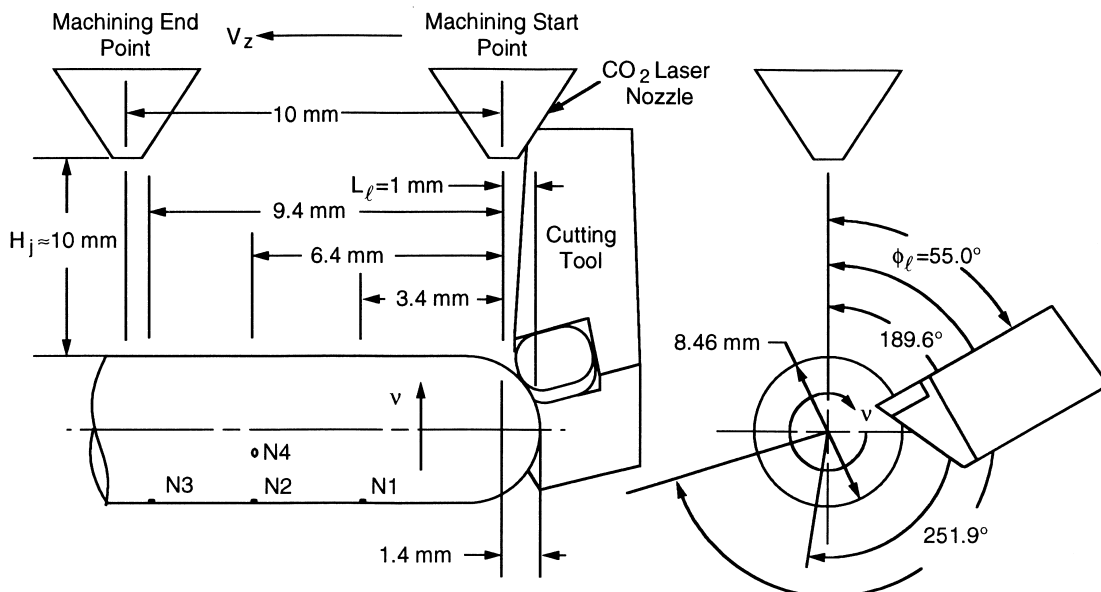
Surface temperature measurement locations during laser assisted machining.
